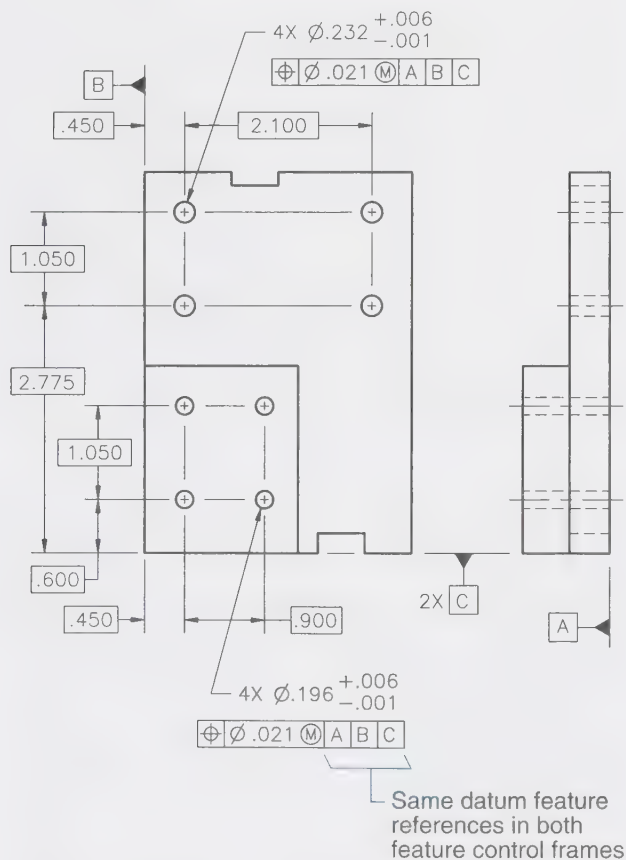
The eight holes in the given part create a single pattern because the position tolerances reference the same datums, in the same order of precedence, and with the same material boundary modifiers.
